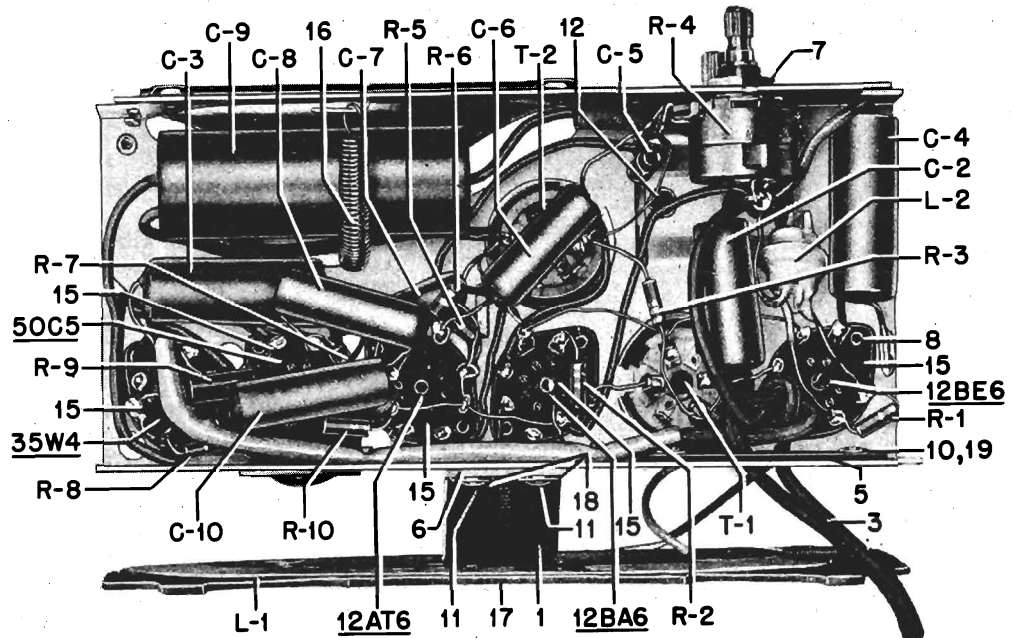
PARTS LOCATION - CHASSIS BOTTOM VIEW
